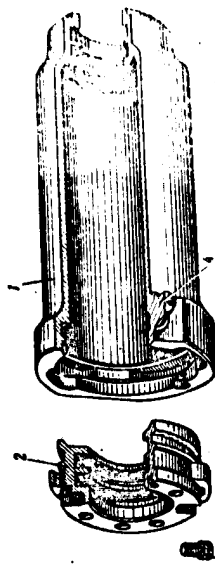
Cylinder and Bushing of 54-11 4, 3
